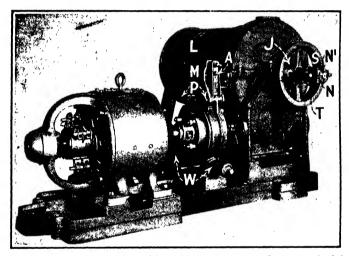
Drum-type elevator machine with motor mounted on same bedplate.
